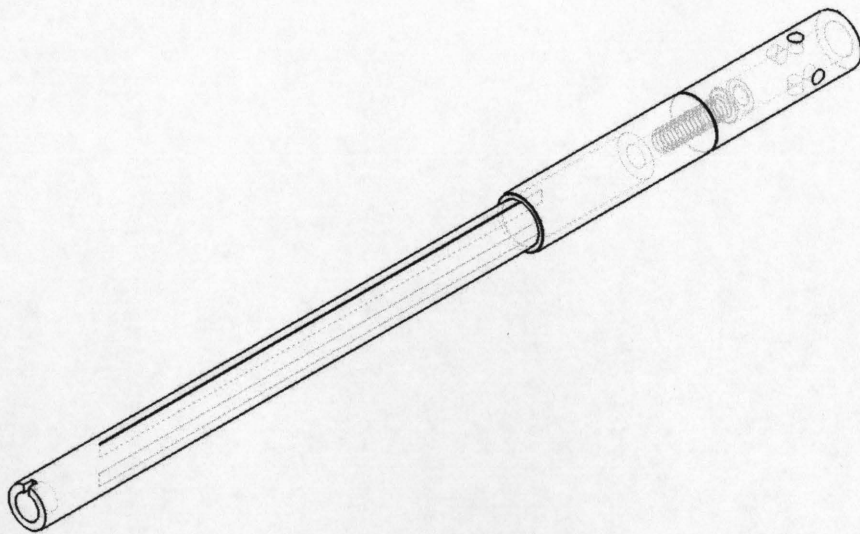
Isometric view of the permanent assembly - cantilever cylinder containing the silicon rubber chord stock, stainless steel strips, the aluminum fixture and adaptor with the 1/4in socket head cap screw
